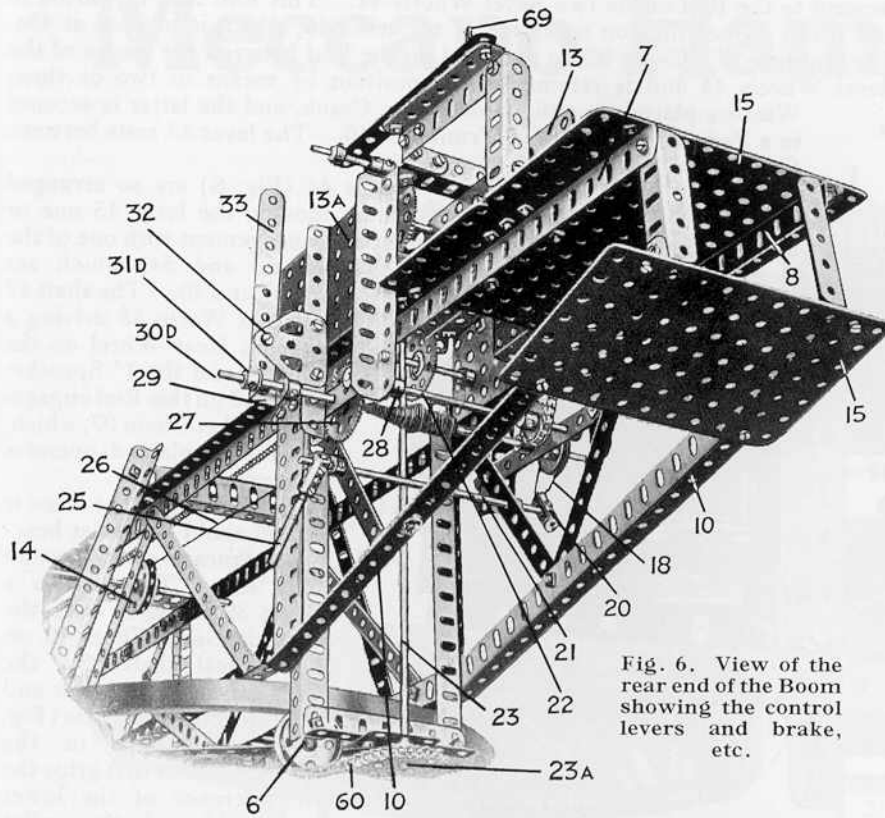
View of the rear end of the Boom showing the control levers and brake, etc.
